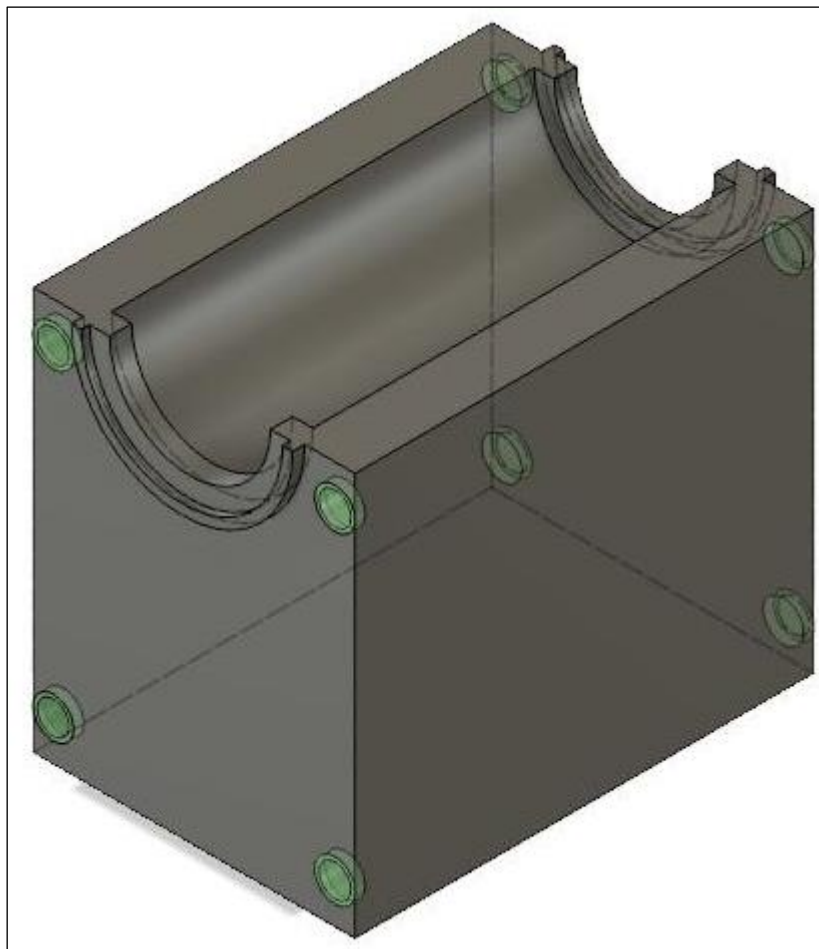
Preserved region for shape optimization of base part of motor support assembly.
